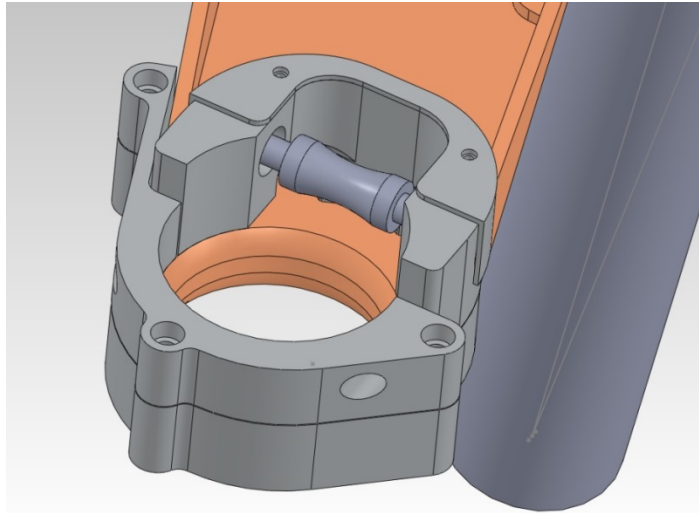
AVASS Roller Bearing Design for Lower Brackets V2.0 Top Angle View
